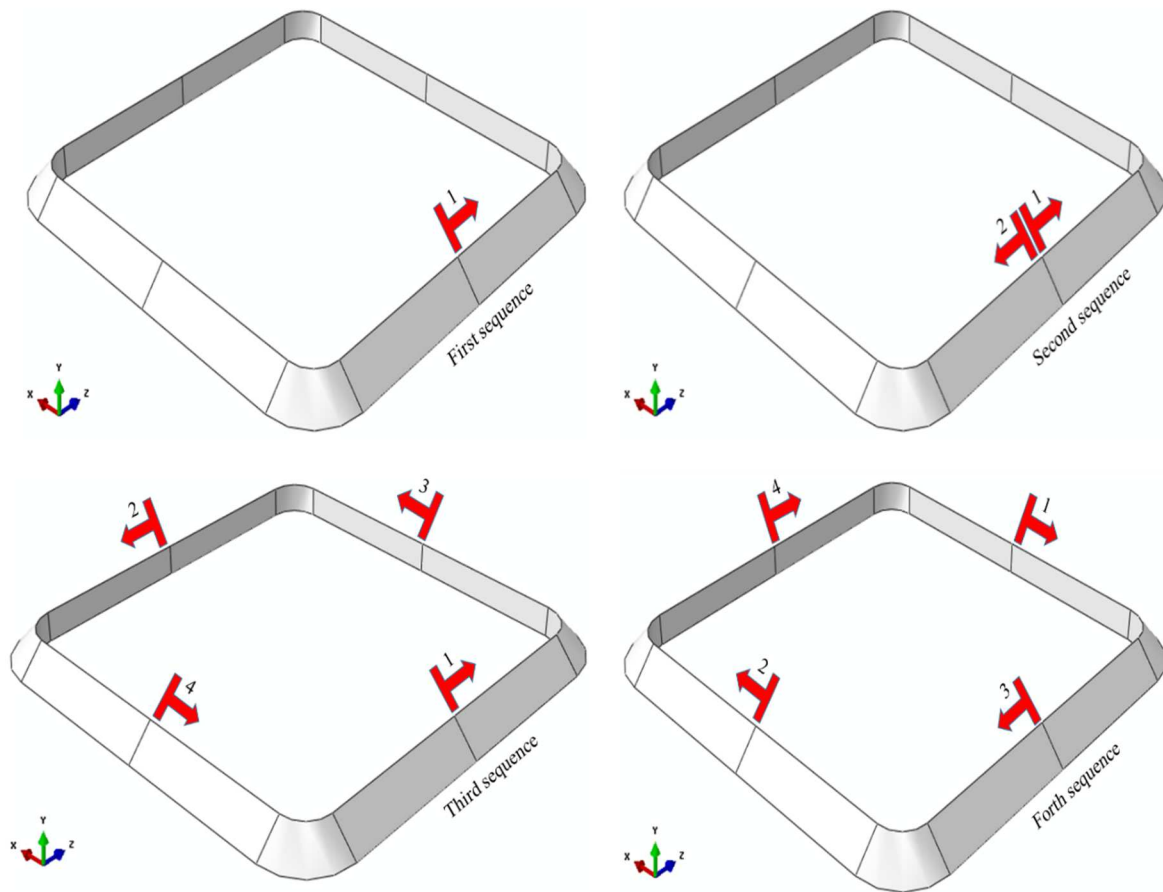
Sequences of welding, welding start and stop location
